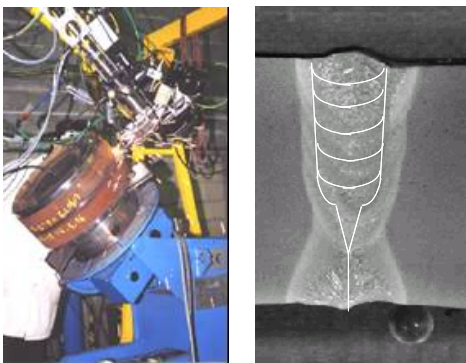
2G Hybrid welding on 19mm thickness tube (20" diameter) in X80 steel, with 1 root pass and 4 filling passes (2.2mm by welding pass)
